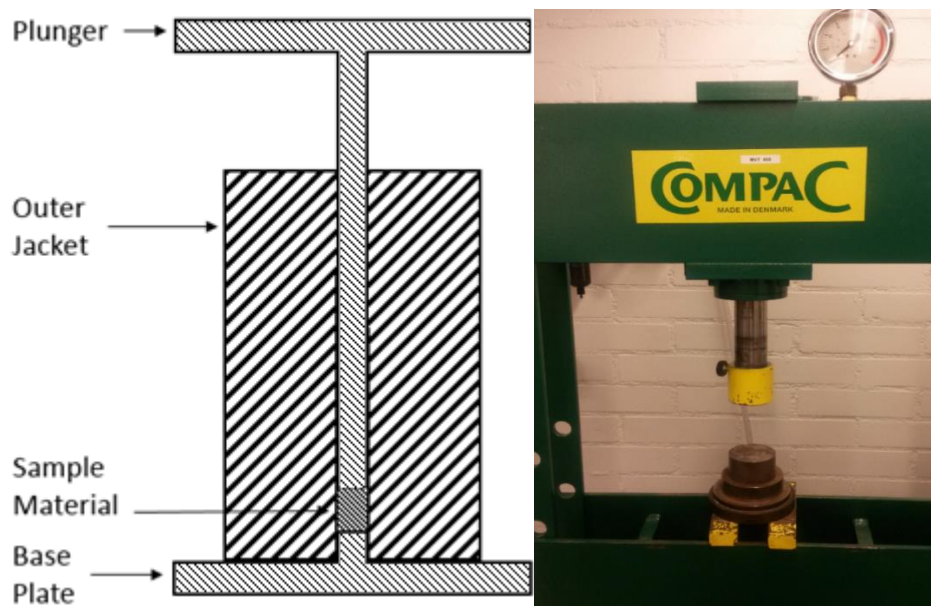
Cross section of the pellet mould and photograph of the hydraulic press.
